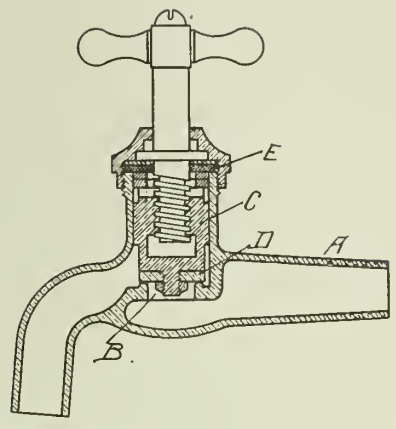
Cross section of plain compression Bibb Cock for a solder joint.
